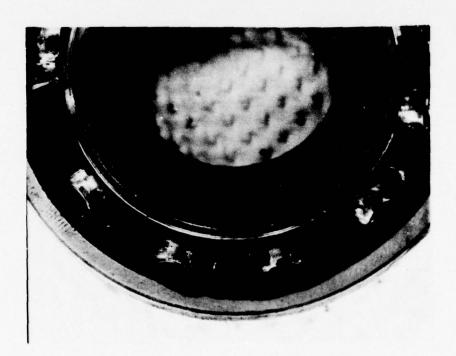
Bearing S/N TRL-6. 2.5x Enlarged View.
